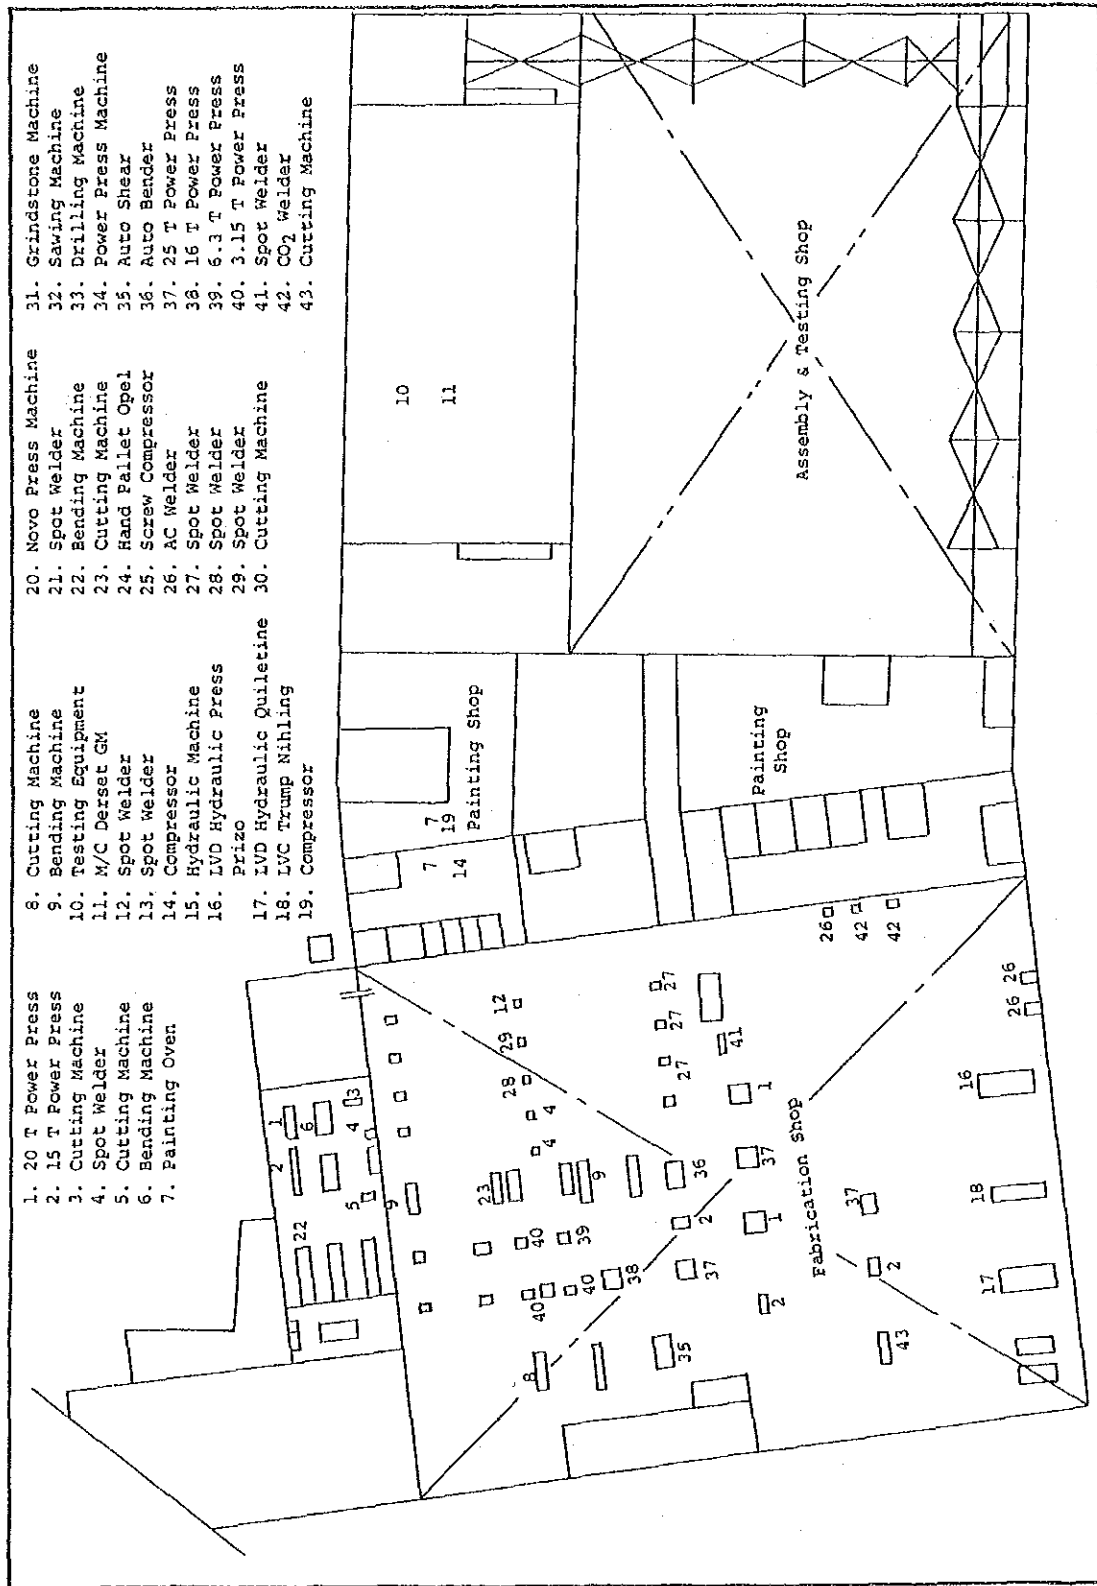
LAYOUT OF EXPANDED FACTORY OF MANUFACTURING SWITCHGEAR
